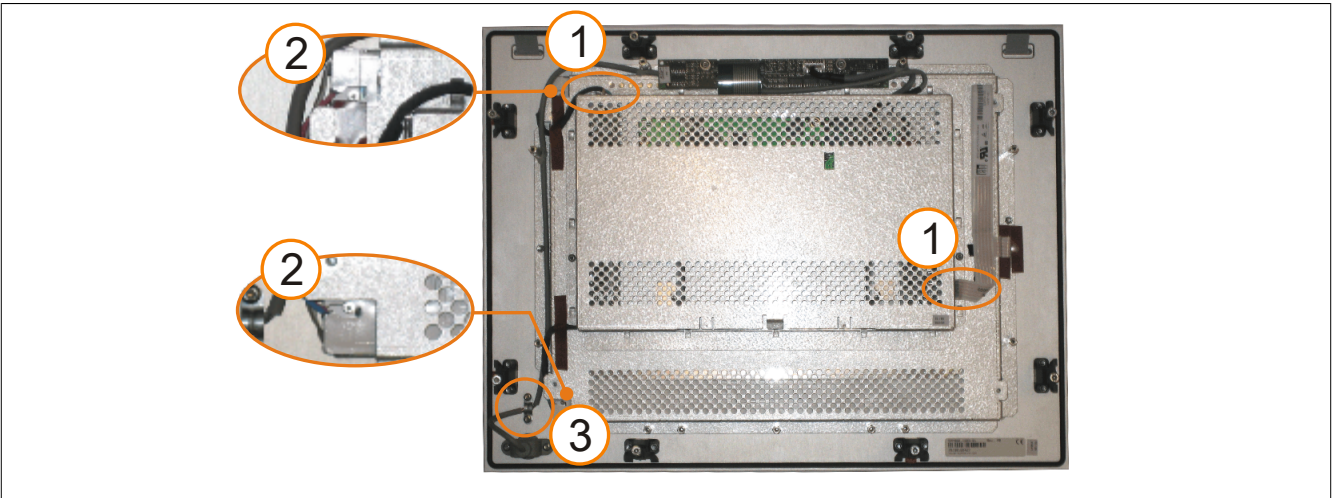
15" Automation Panels - Unscrewing and disconnecting
